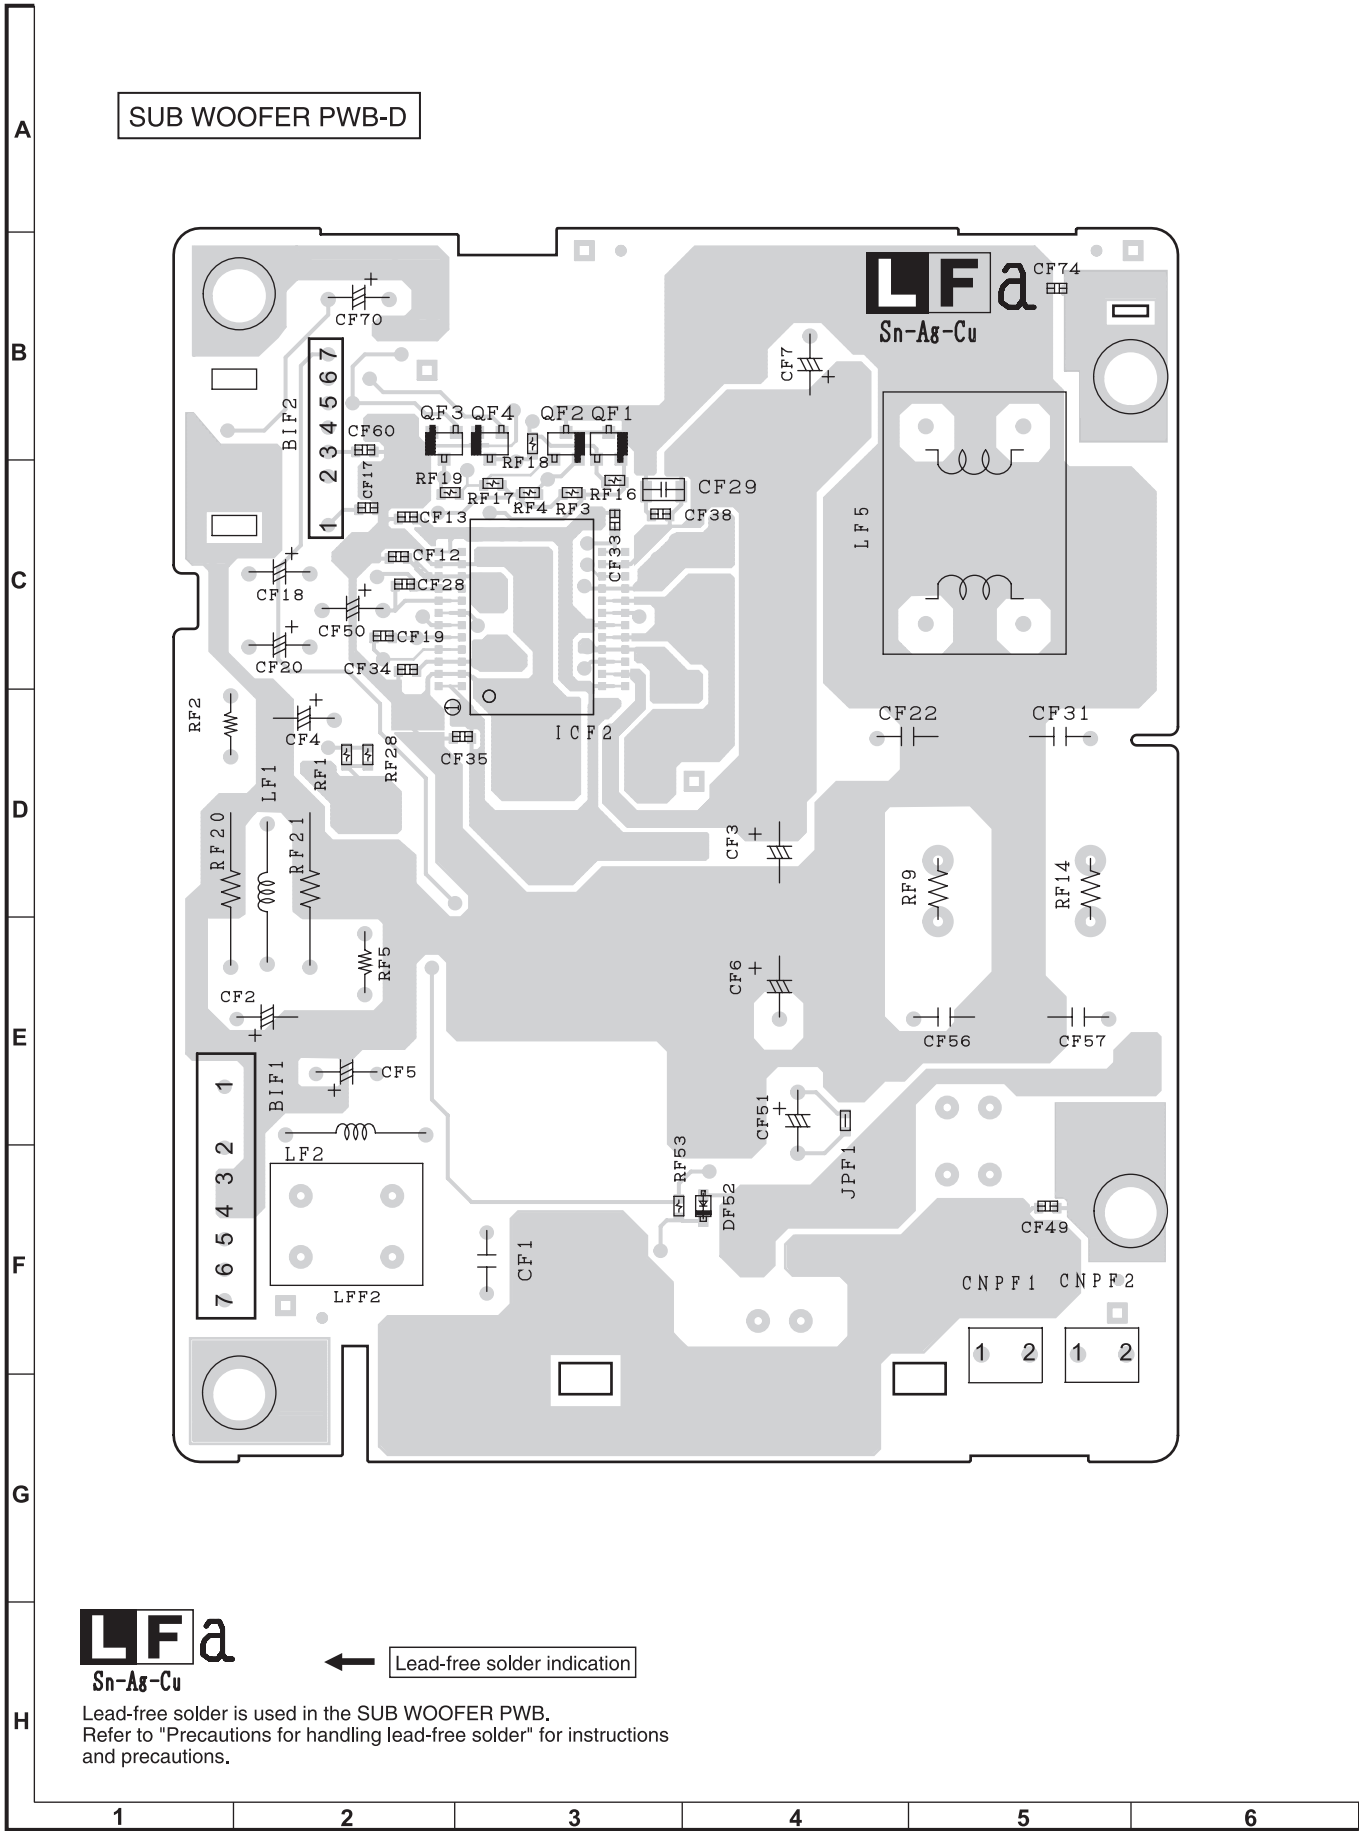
WIRING SIDE OF SUBWOOFER PWB (TOP VIEW) (13/15)
